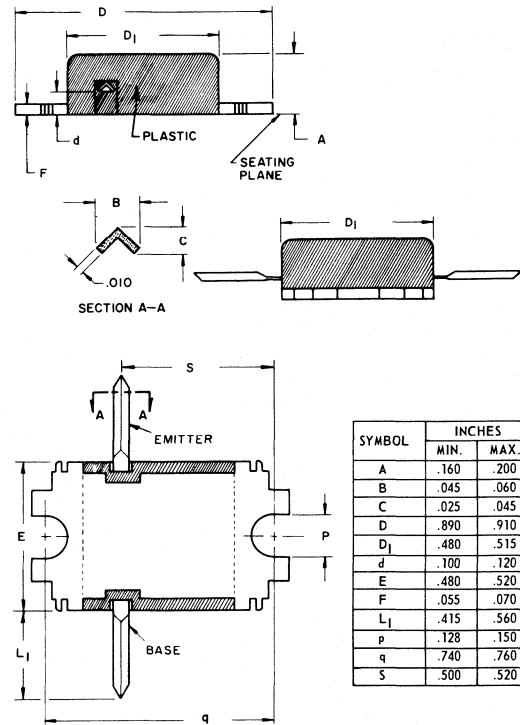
JEDEC TO-219AB high-power molded-plastic transistor package.
